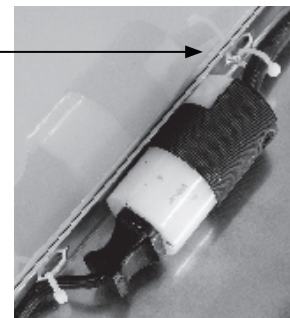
, Attaching Battery Heating Mat Line Cord to Side of Enclosure
